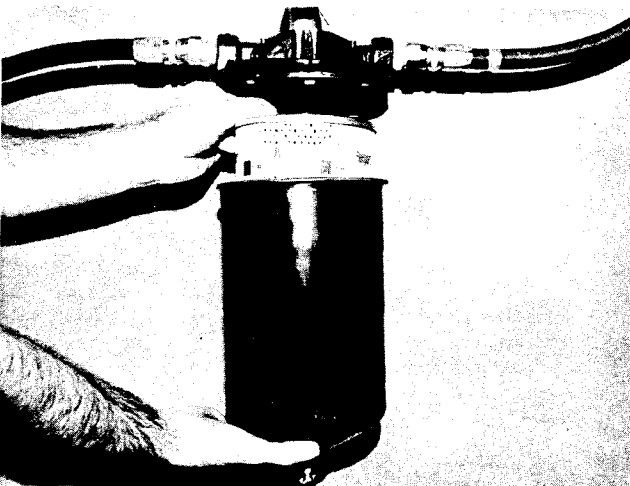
(V11910) Installing replaceable fuel filter element
